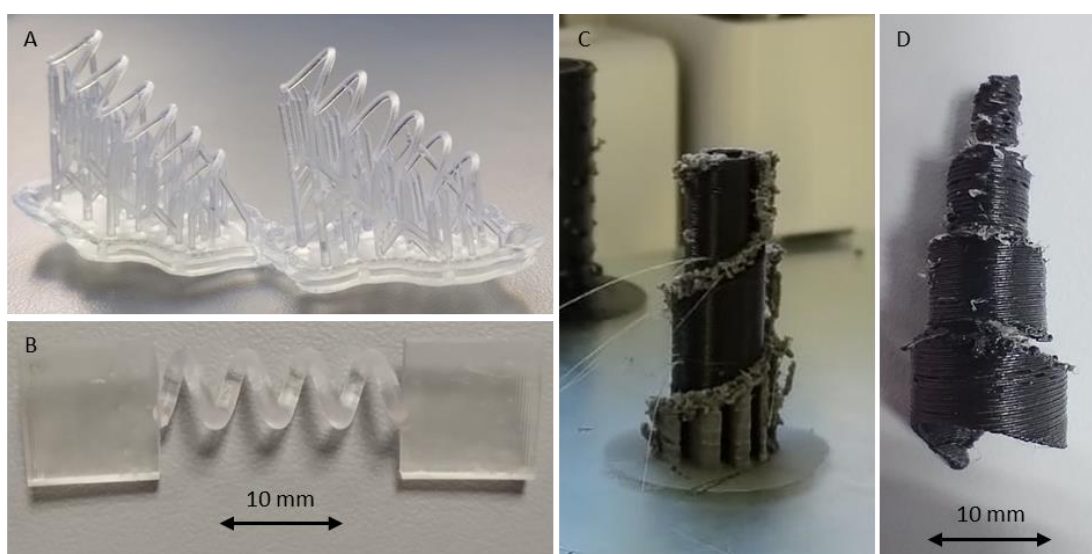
A: SLA 3D printed spring. B: SLA printed spring with support for mechanical testing. C: FDM printed spring with a two component printing system using water soluble PVA as a support. D: Cleaned FDM printed TPU spring.
